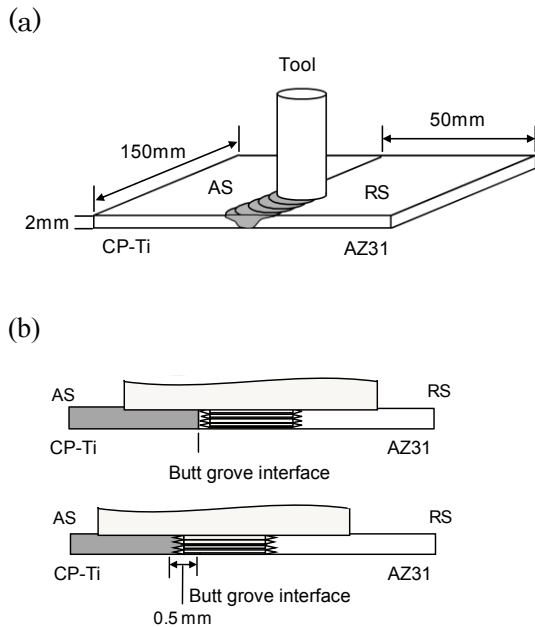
Schematic illustrations of dissimilar joint arrangement in FSW (a) showing a probe offset into CP-Ti side (b).
